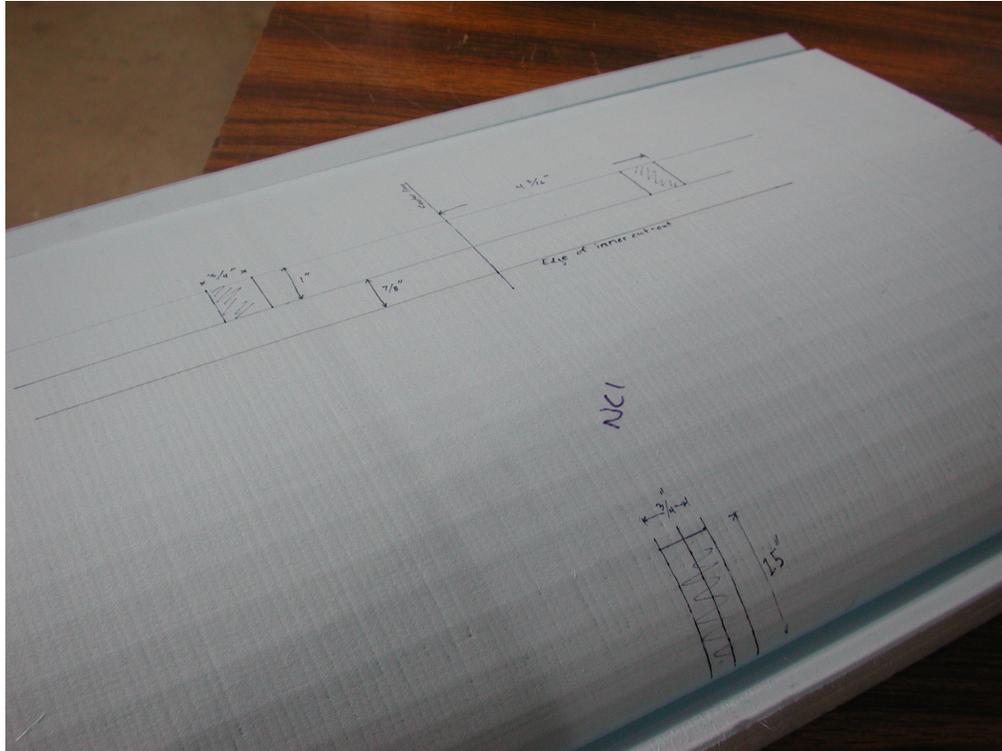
Wing Center-Section – interface mounting thru-holes marked.
